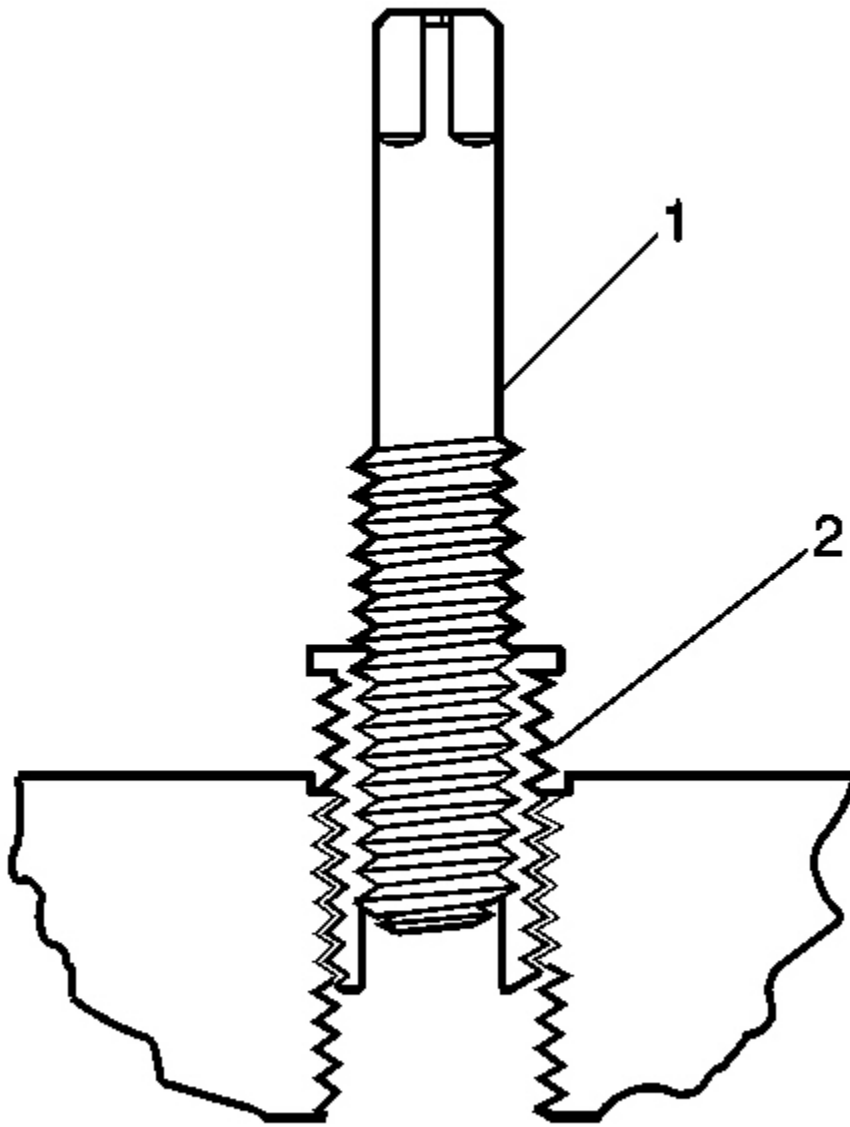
Installing Insert Into Bolt Hole Using Installer Tool
